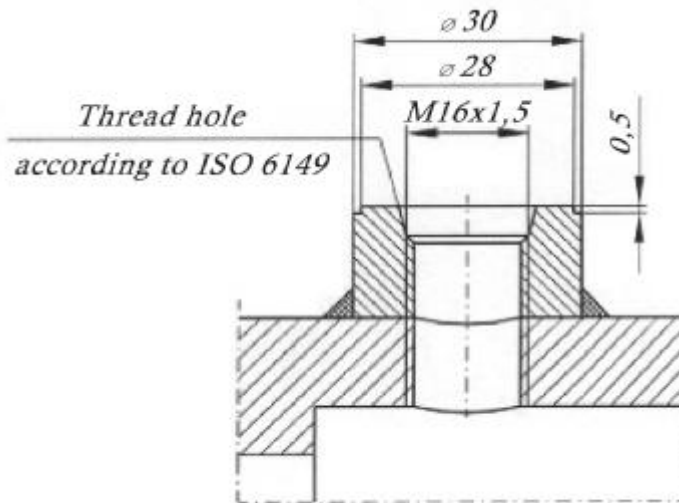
Assembly hole for the HF-Pulse sensors HF3 up to HF6 in the meter body
